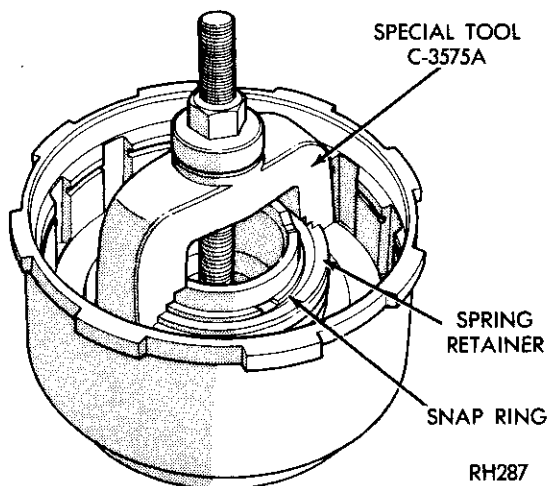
Removing Front Clutch Spring Retainer Snap Ring—999
